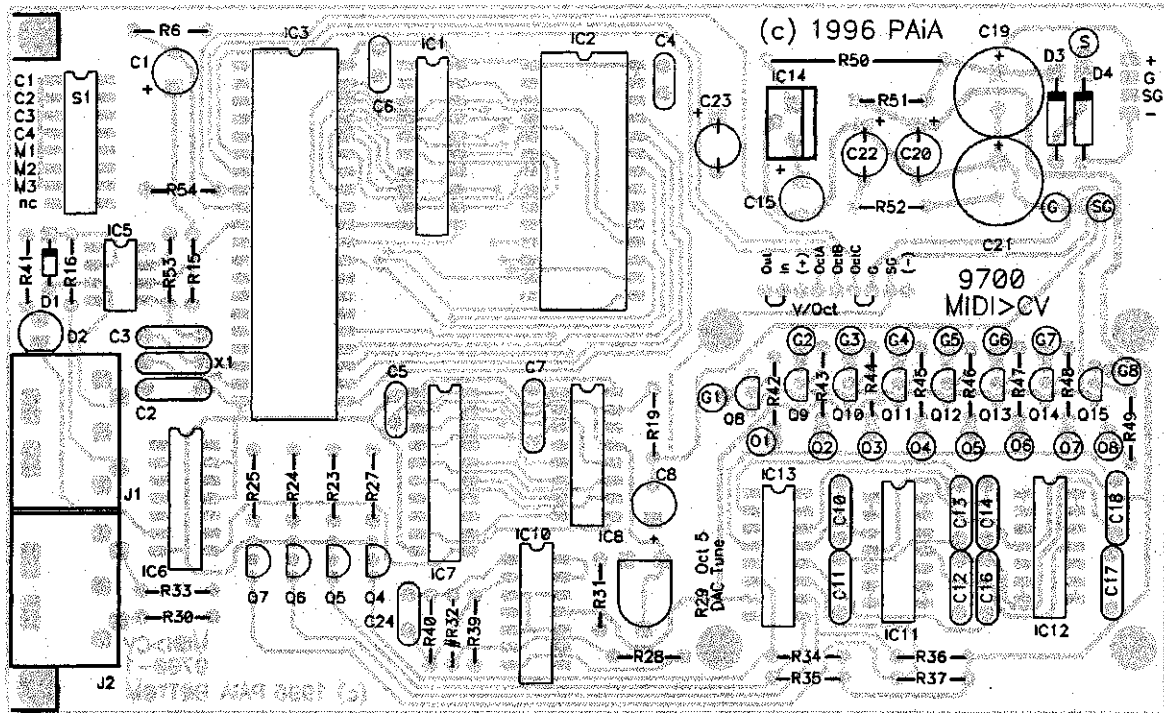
Conductors on the top layer of the circuit board have been eliminated in this view that shows phantom bottom traces. This illustration will be useful if you need to trace out the circuit.
